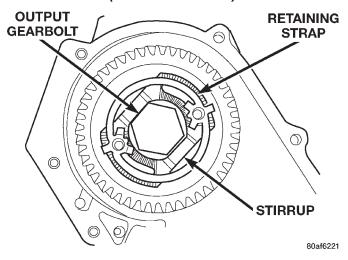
Stirrup Strap (Align Strap Holes With Tapped Gear Holes)
